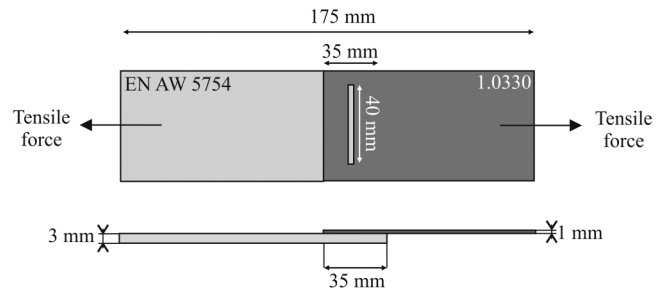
Schematically illustration of the tensile shear test specimens top view and side view.
